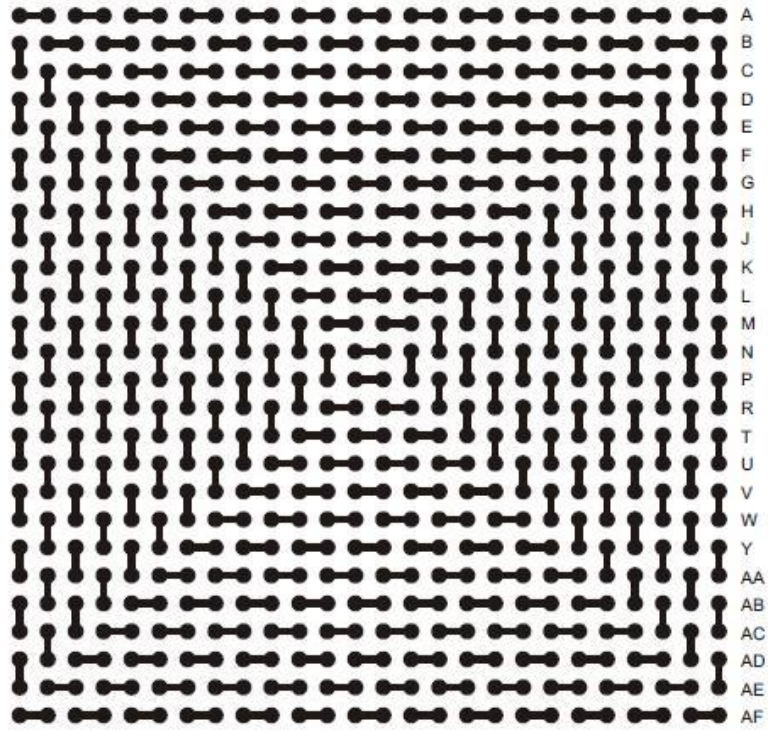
PBGA 676 Component Side Daisy Chain Courtesy: Practical Components
